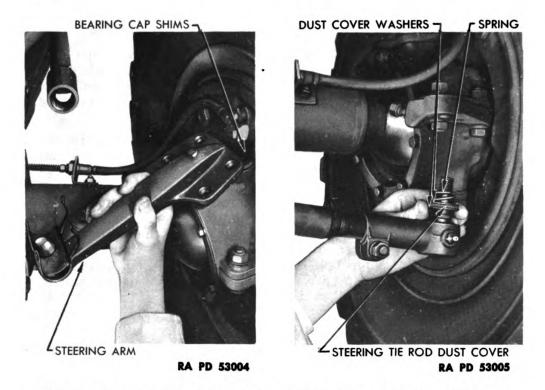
Removing Steering Figure 162—Installing Tie Rod Arm Dust Cover
